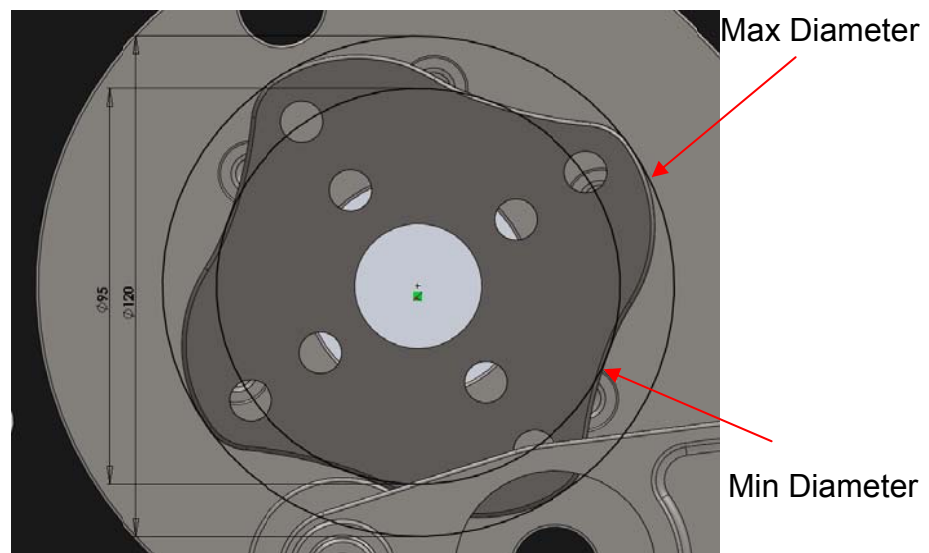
Cam Detail of 2nd Prototype showing Maximum and Minimum Diameters
